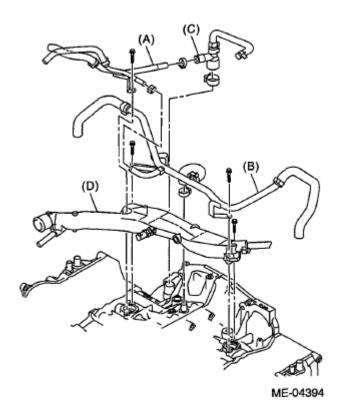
Identifying Blow-By Pipe Assembly, Blow-By Pipe, PCV Hose Assembly And Water Pipe Assembly
